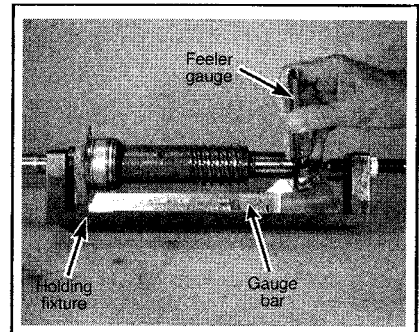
Use the appropriate gauge to measure clearance at the pinion
